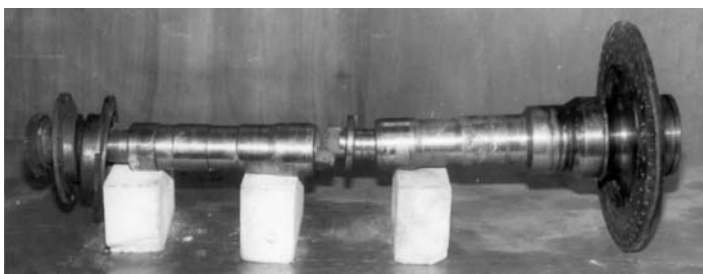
Fractured drive shaft with damaged seal carrier and coupling
